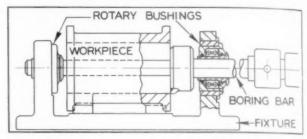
A boring fixture, for use with a horizontal spindle machine, incorporation rotary pilot bushings. For purpose of easier comparison with the plain hushings shown in Fig. 16, the workpiece and general setup are practically identical. The rotary bushings permit a close fit on the bar and, as there is little if any heat generated because of friction between the bar and the bushing, to cause expansion of the bar, fit between the two remains practically constant and assures more accurate boring over sustained intervals of time.
